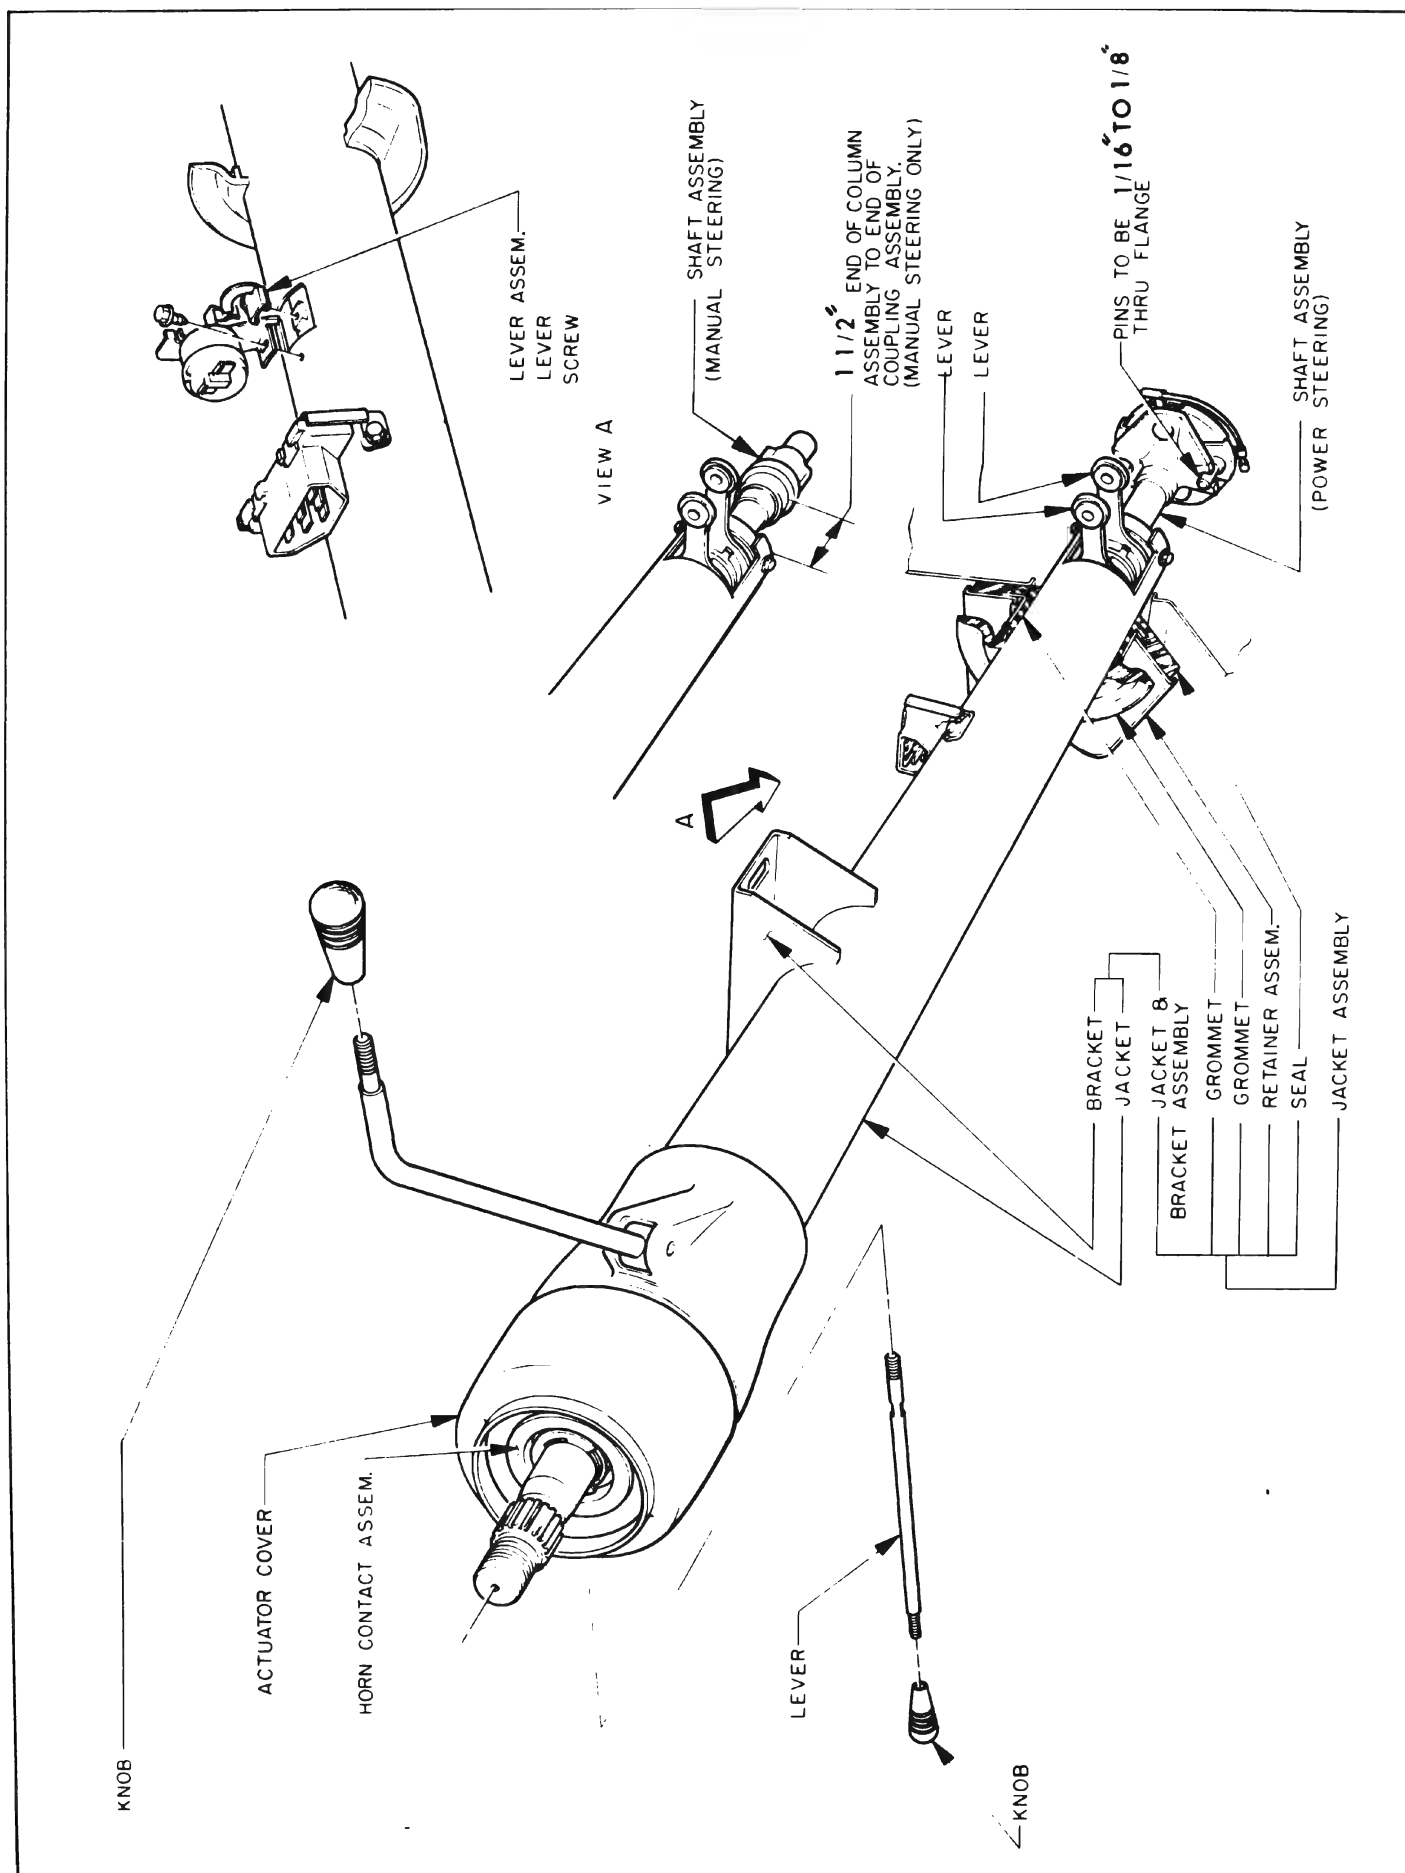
Steering Column and Transmission Control Shaft Assembly—4400 Three Speed Synchronesh Transmission
